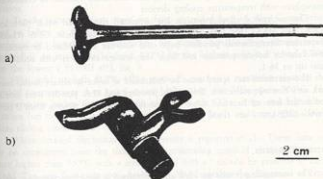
FeAl components: a) automotive inlet valves; b) a rocket.
